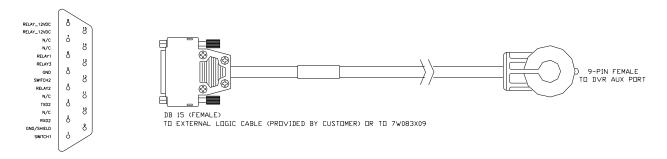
DVR Auxiliary Cable - 7W083X06-01
